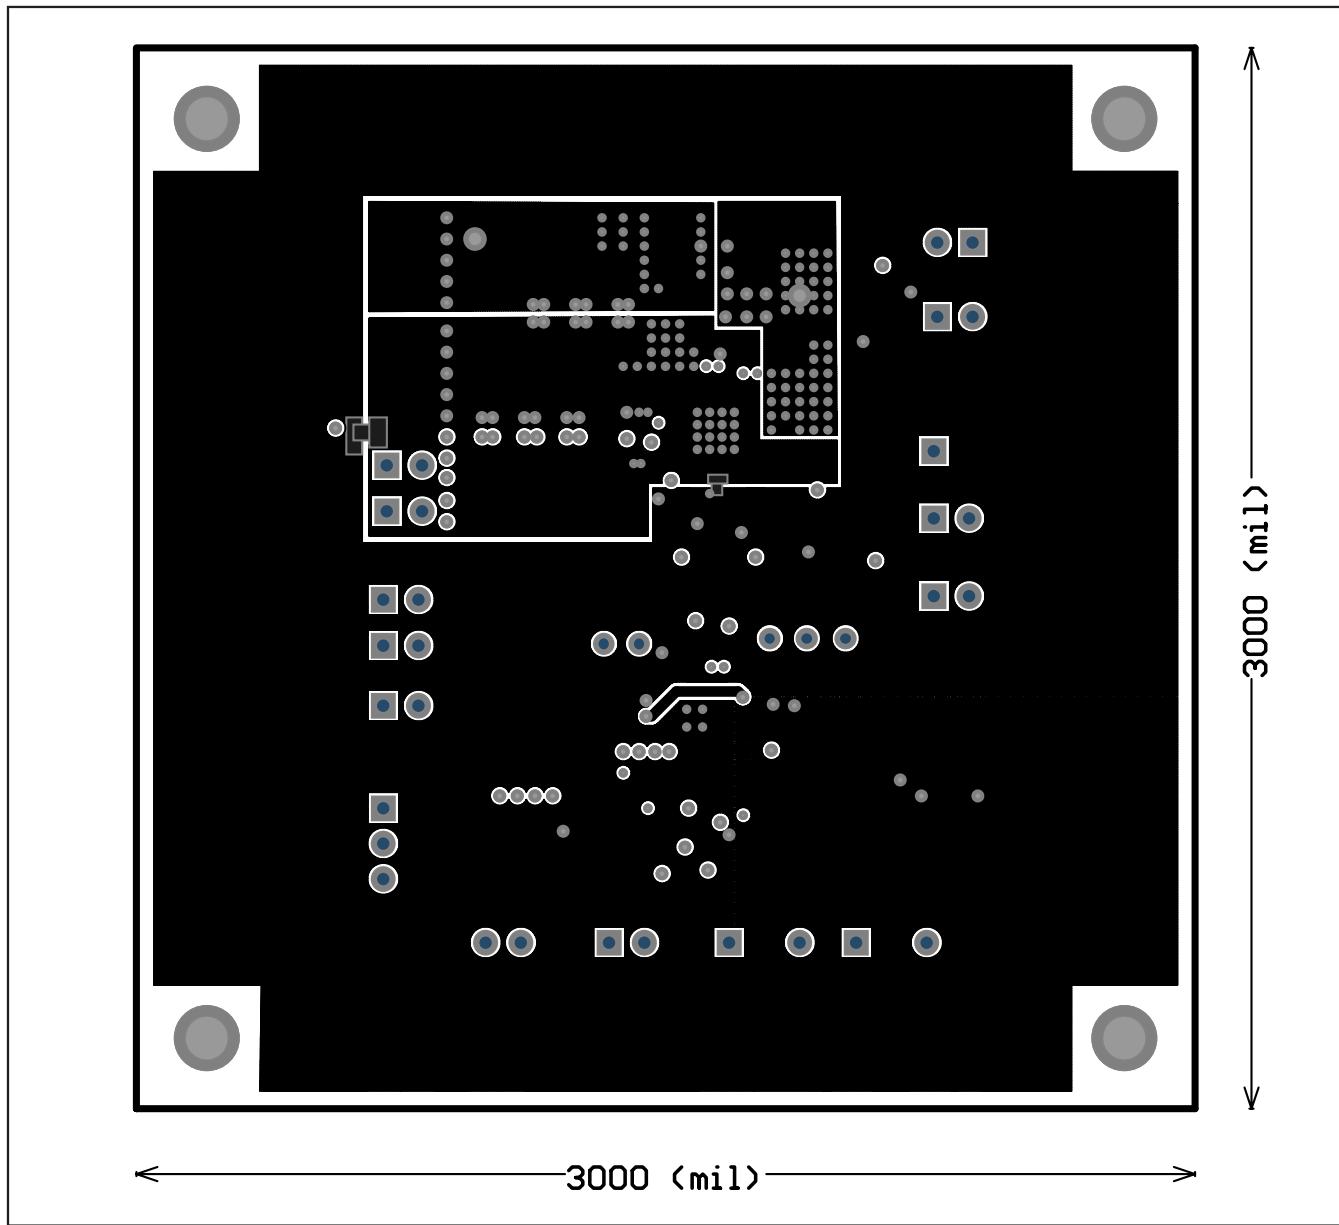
MAX8654 EV Kit PCB Layout—Solder Side
